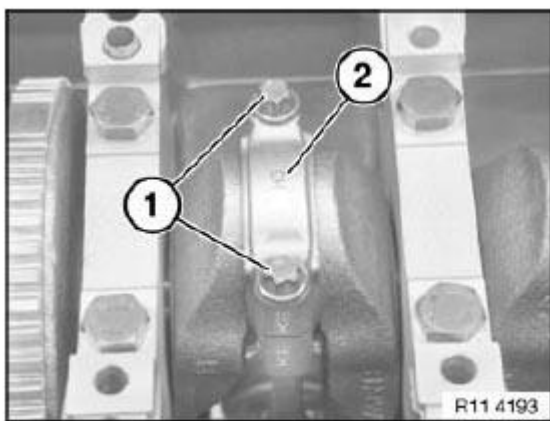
Conrod Bolts And Connecting Rod Bearing Cap
